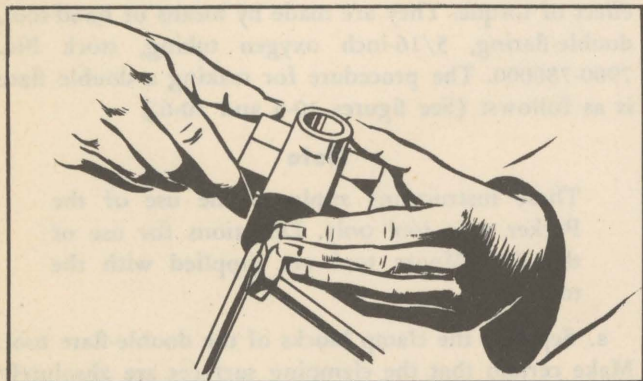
Clamping Burred Tube in Double Flaring Tool
